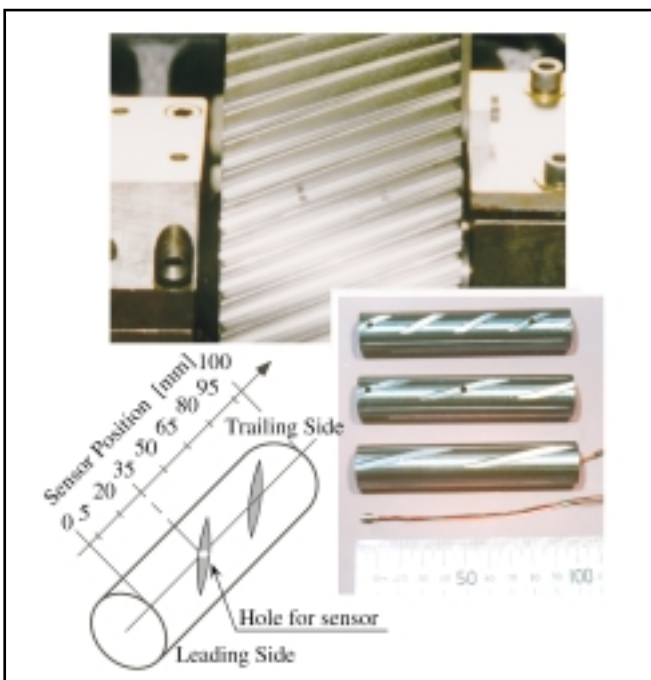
Appearance of rods and gear with rods at the bottom of teeth.
